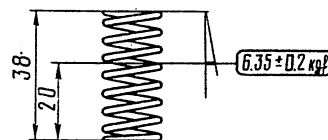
Basic Data for Checking the Reducing Valve Spring
